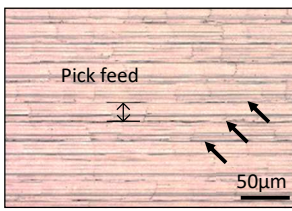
Machined surfaces for Type C and cutting distance of 990 m
